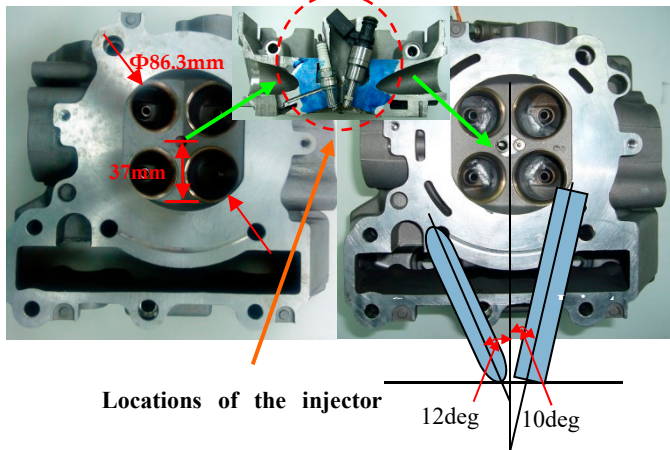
(a) Cylinder head of the PFI engine Fig. 1(b) Cylinder head of the GDI engine after modification
